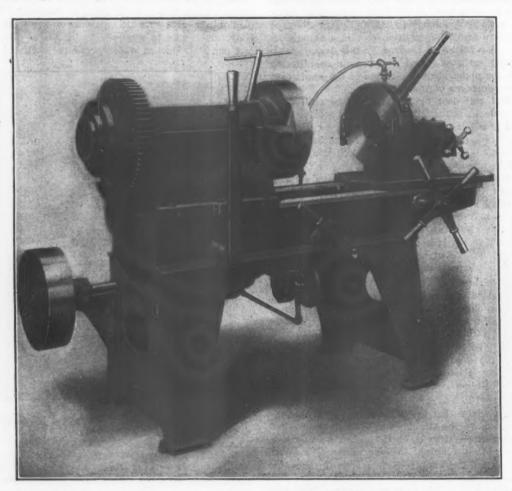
The Operating Side of the Belt-Driven No. 2 Pipe Threading and Cutting-off Machine Built by the Williams Tool Company, Erie, Pa.
